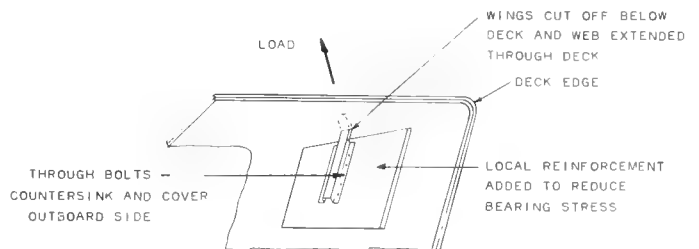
Chain Plate Attachment - Wing Channel Side Stay Chain Plate
